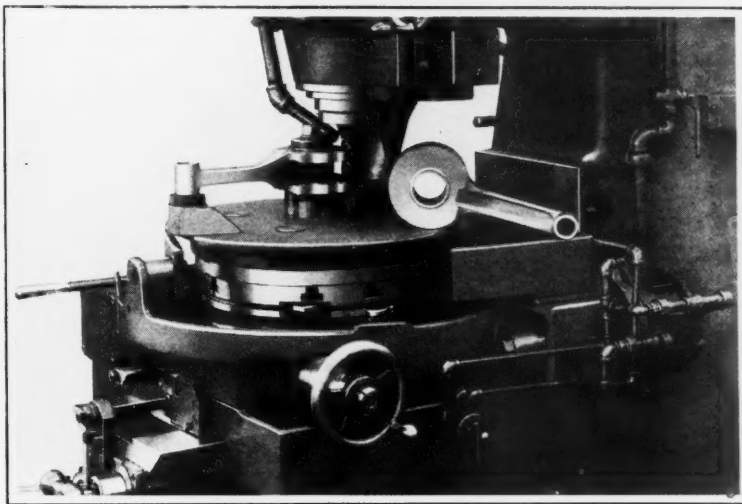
The Circular Bosses on the Flanges are Milled by Using a Table with a Reciprocating Movement Produced by Cam Action
